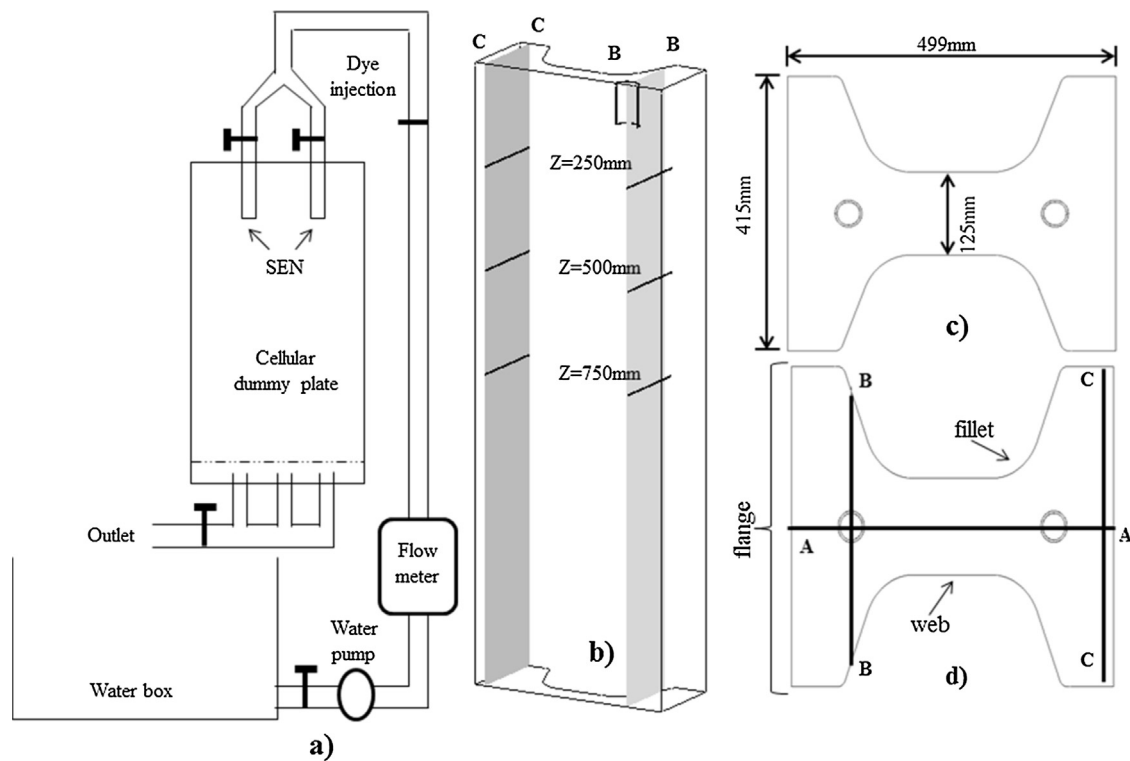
(a) Schematics of 1:1 beam blank model of a mold; (b) isometric view of the beam blank with one nozzle; (c) beam blank dimensions; (d) cross section of beam blank depicting cutting planes AA, BB, and CC.
